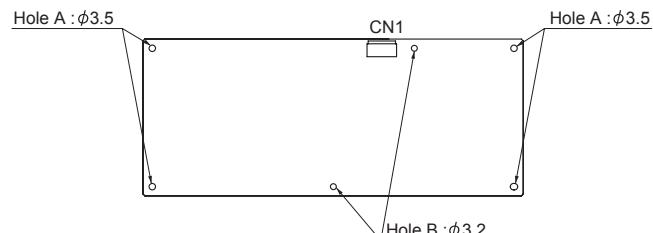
CR-HUT□-2 Resin spacer mounting method
